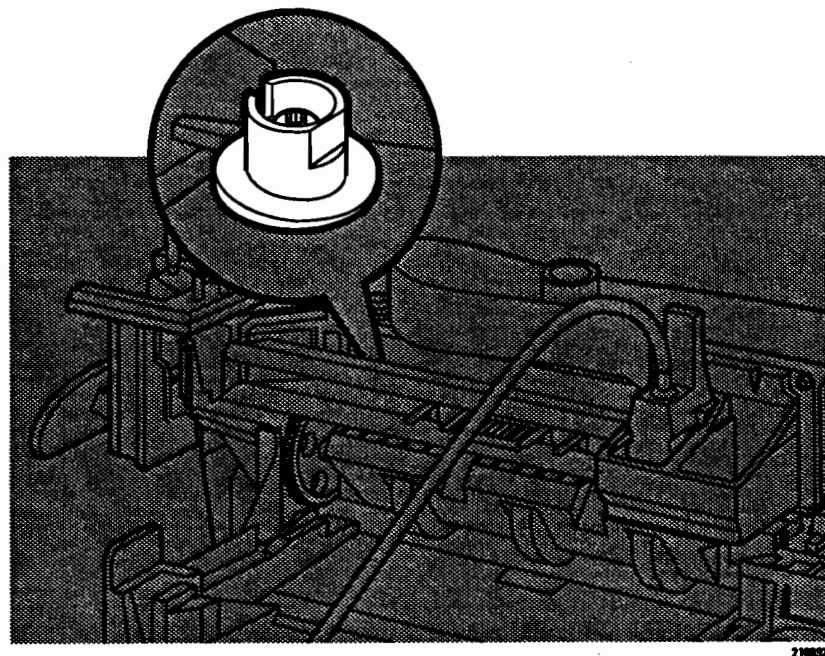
Pivot Adjuster for the Paper Guide-to Pivot Adjustment
